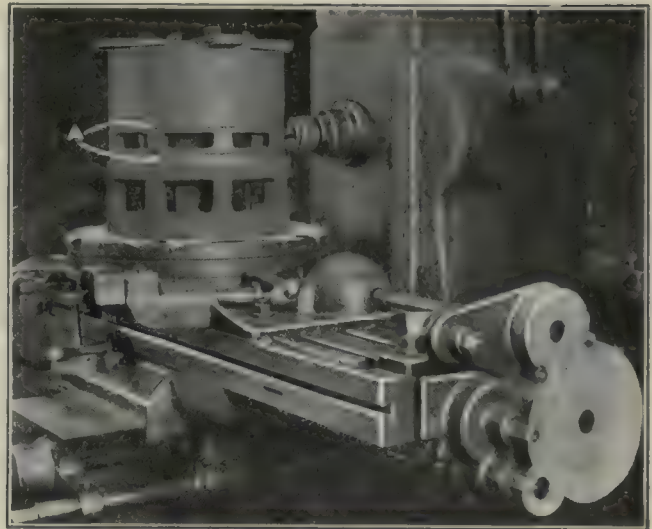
MILLING PORTS IN A VALVE BUSHING
